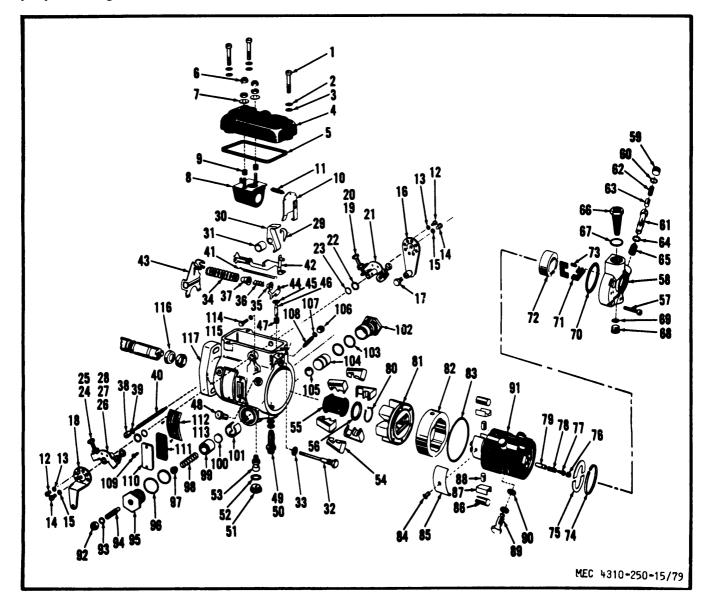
Fuel Injection Pump, Disassembly and Reassembly.
